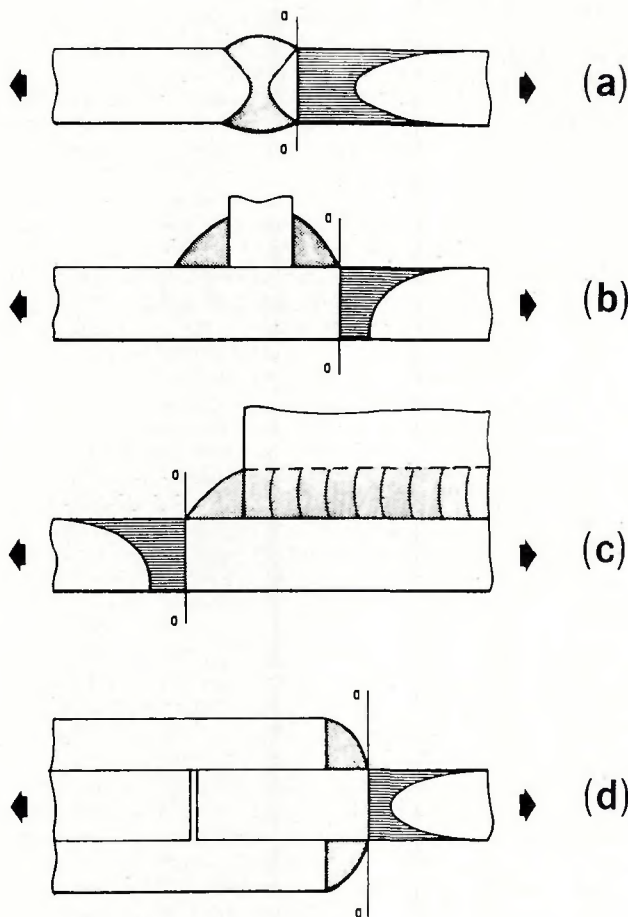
Axial stress distribution in welded plate on section a-a⁶
